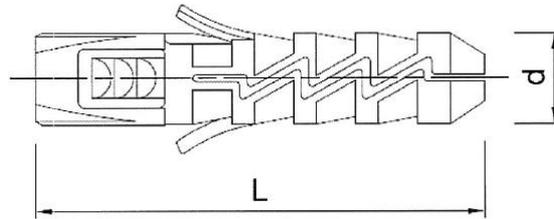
Components of FIX plastic-metal expansion anchors (with a countersunk head screw)
